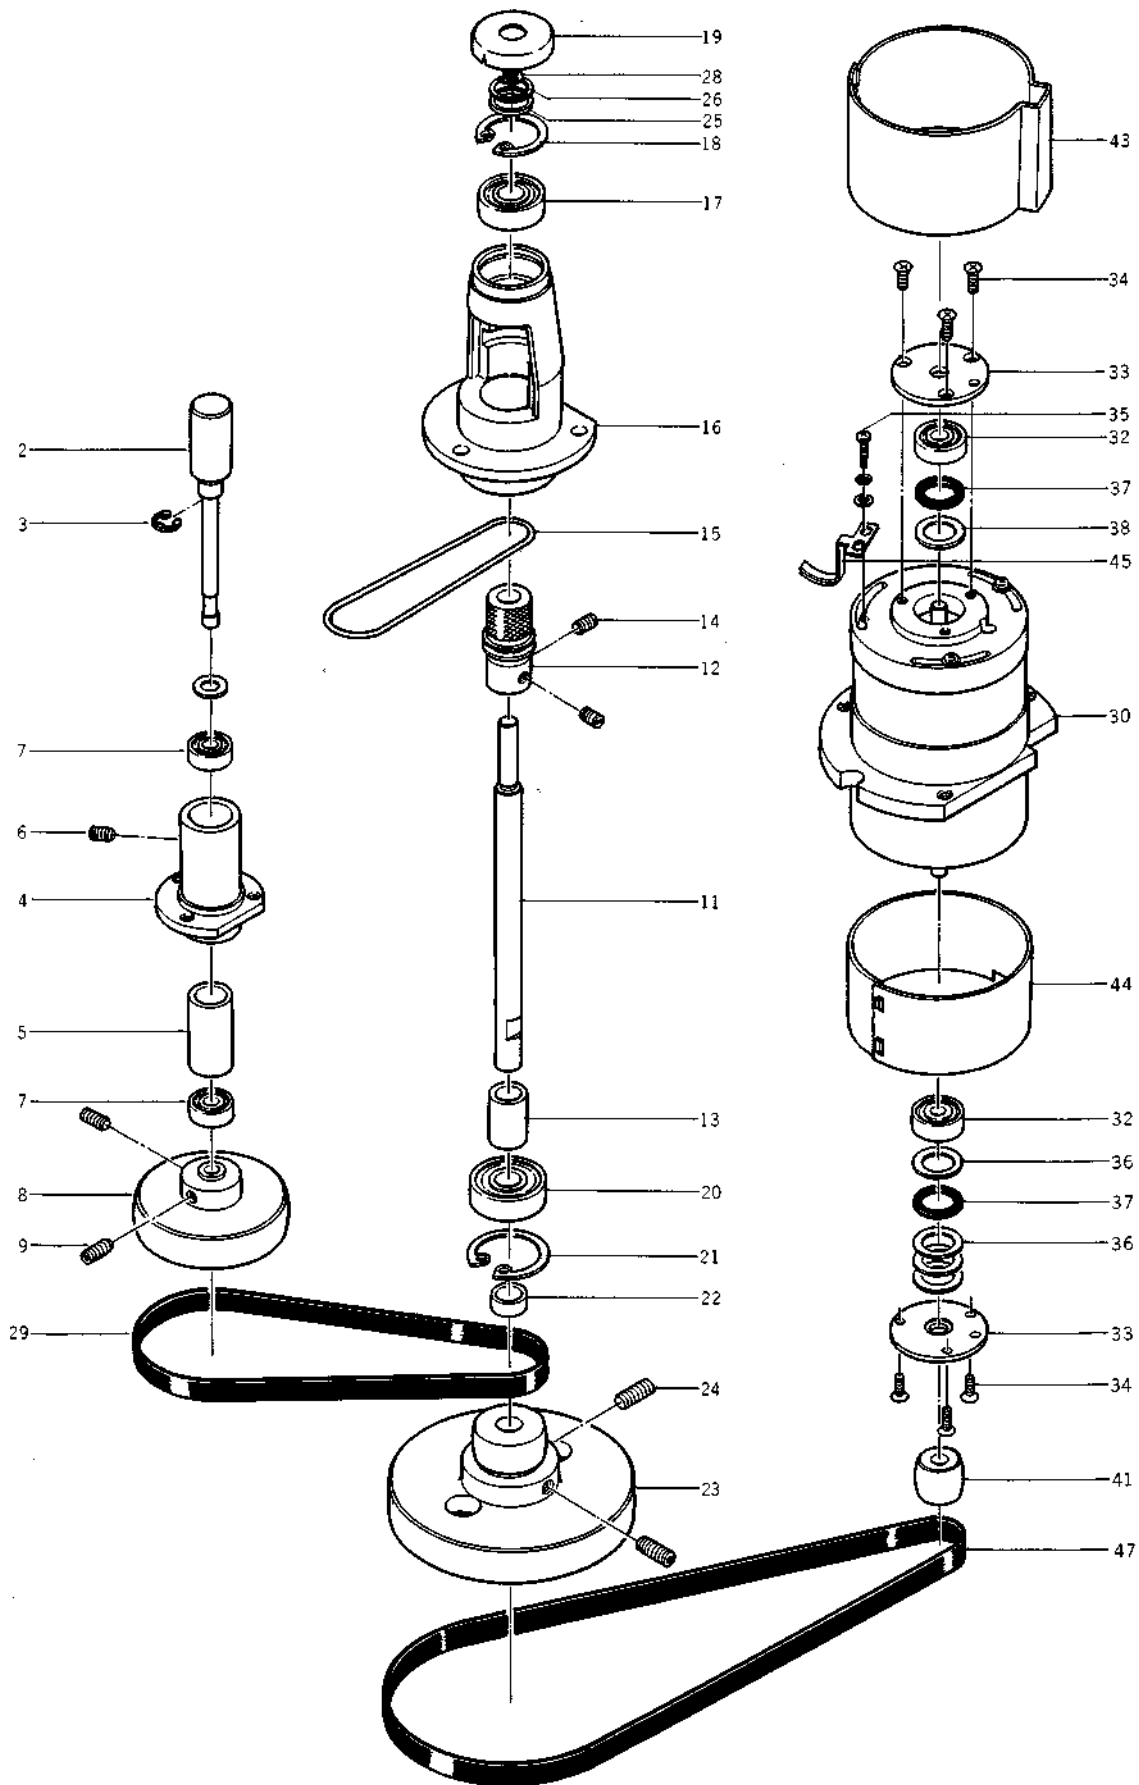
ILLUSTRATION OF REEL TABLE BLOCK
